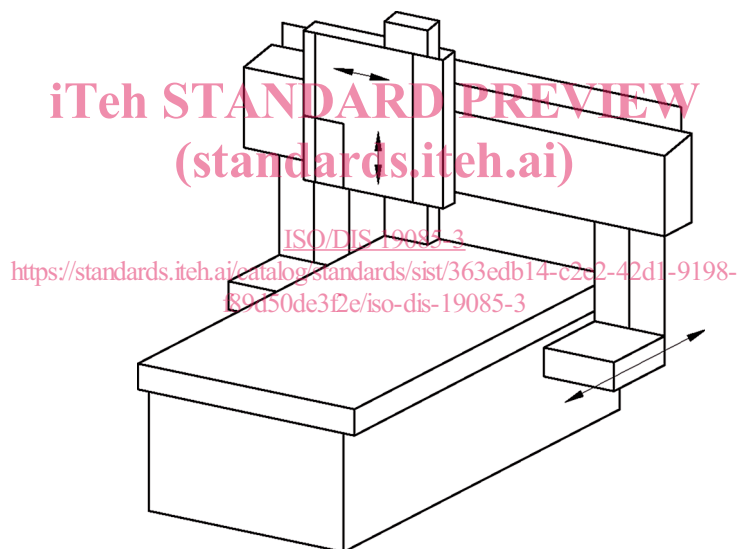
Example of portal frame machine with fixed table, moving portal, moving machining head
